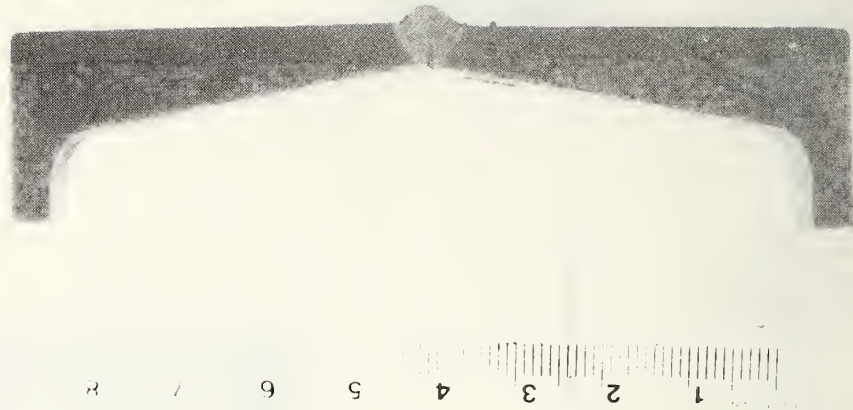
Transverse section through NBS weldment IC welded by the GMAW process using mild steel welding rod. The weld is in the center connecting flange parts of the two channel segments, Parts of the web regions of each channel are also included in the section. Etchant: two percent nital ~X1
